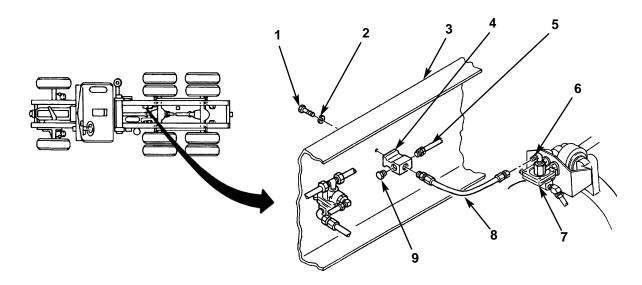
Removing Mountable Tee at Forward-Rear Axle.
